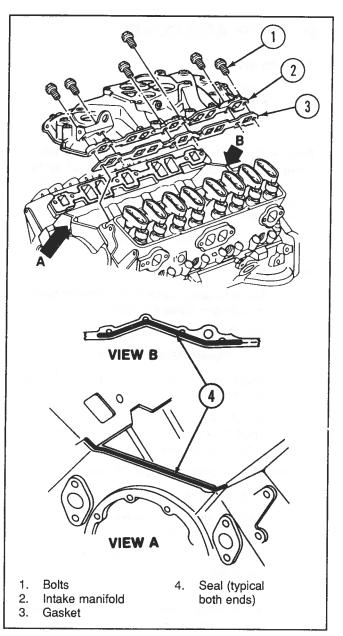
Applying Sealer And Gasket To Heads For Intake Manifold
